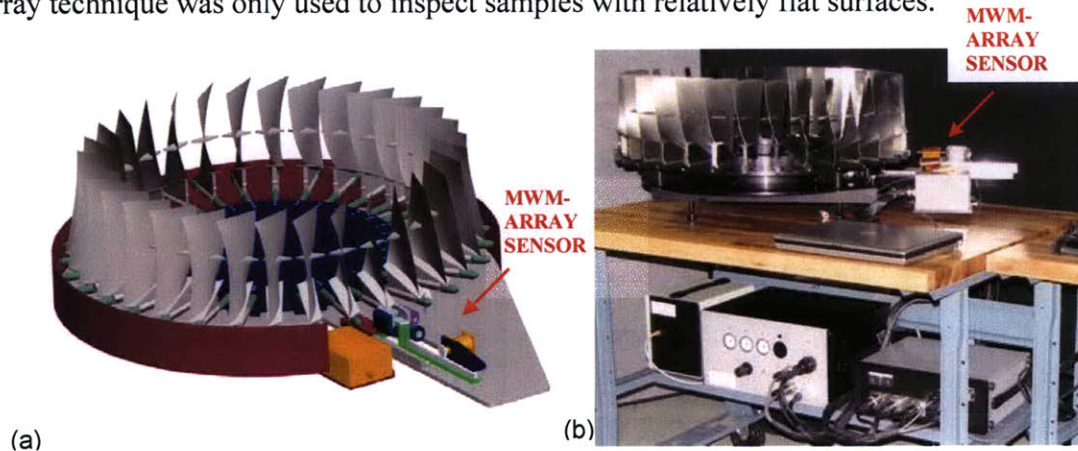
(a) Early CAD concept design for the automated blade dovetail inspection system (b) photograph of a fabricated system currently in use (adapted from [112])
